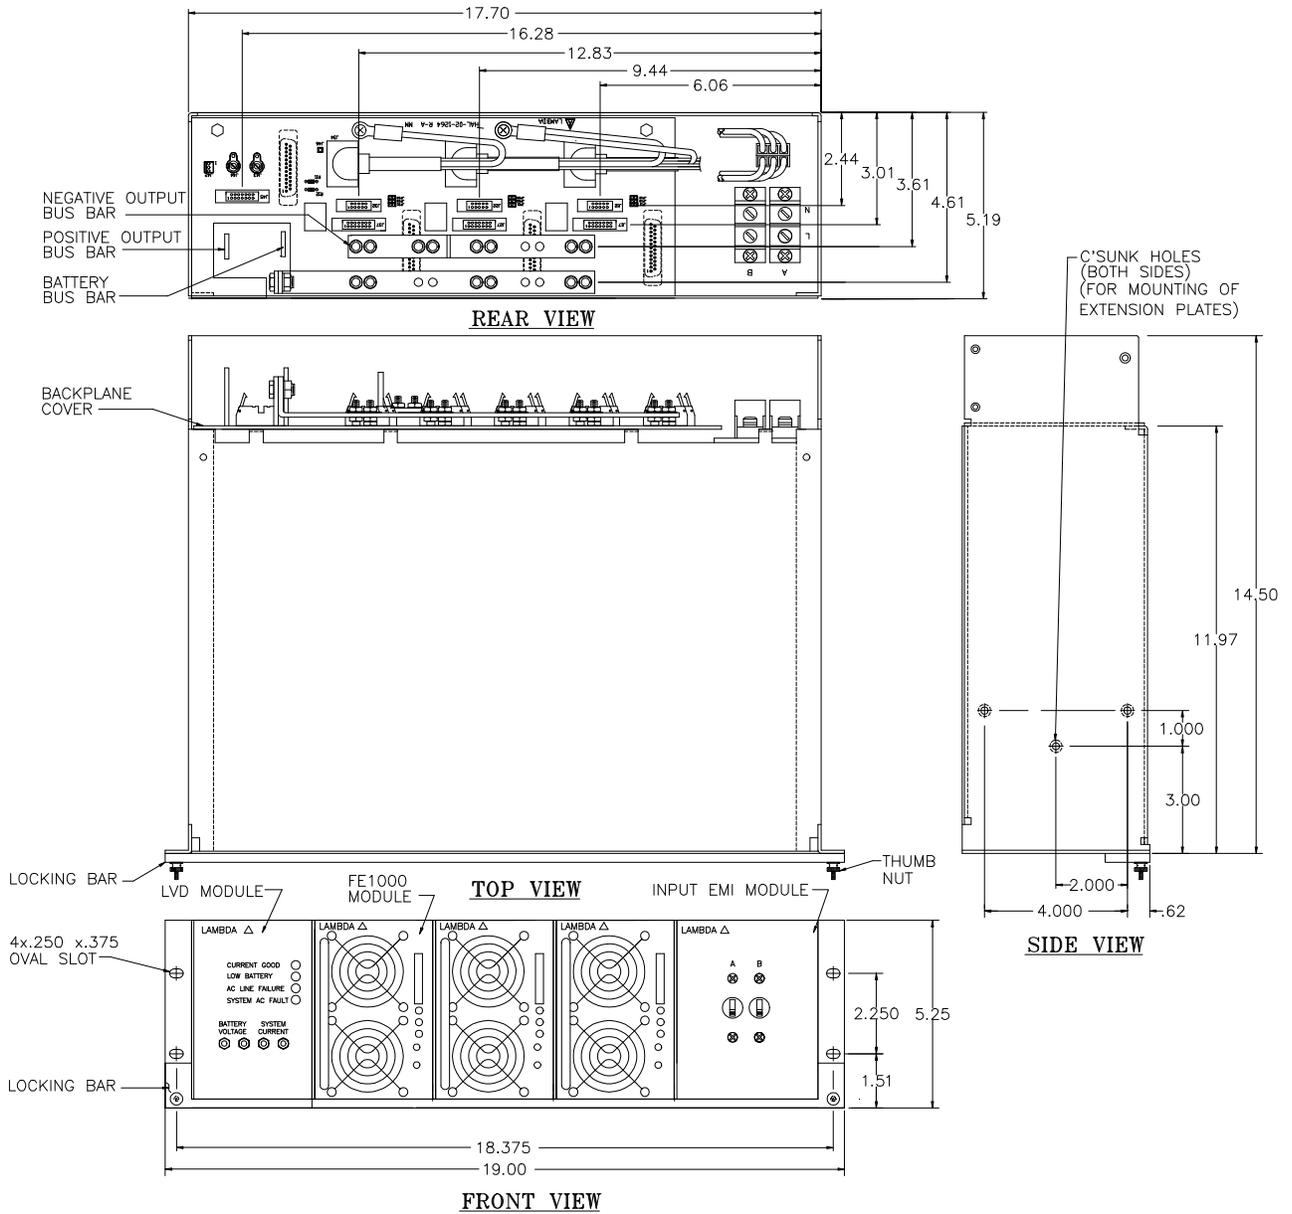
Outline Drawing of FE4K-LE Power Shelf
